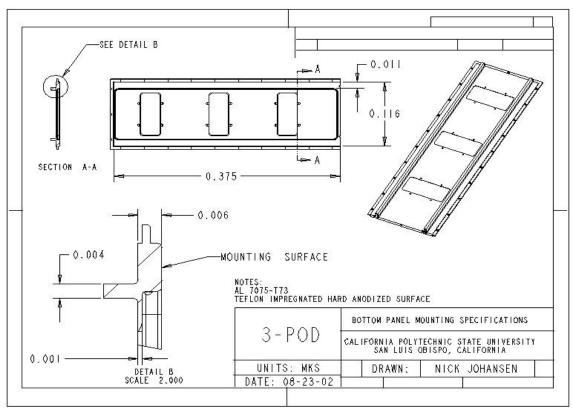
Single P-Pod Bottom Panel Mounting Detail
